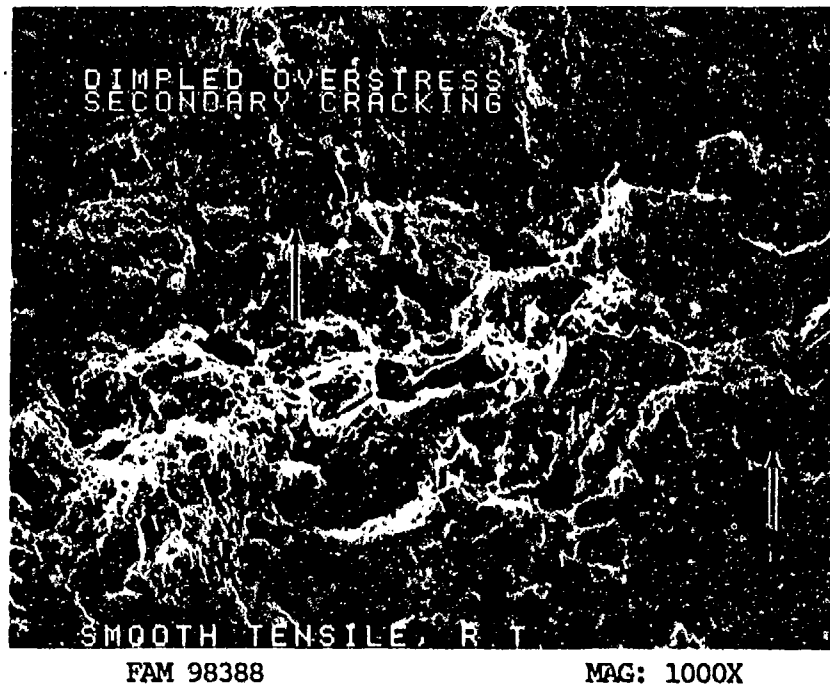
Dimpled overstress, secondary cracking (arrows A) and fractured carbides (arrows B) in the primary fracture area.
